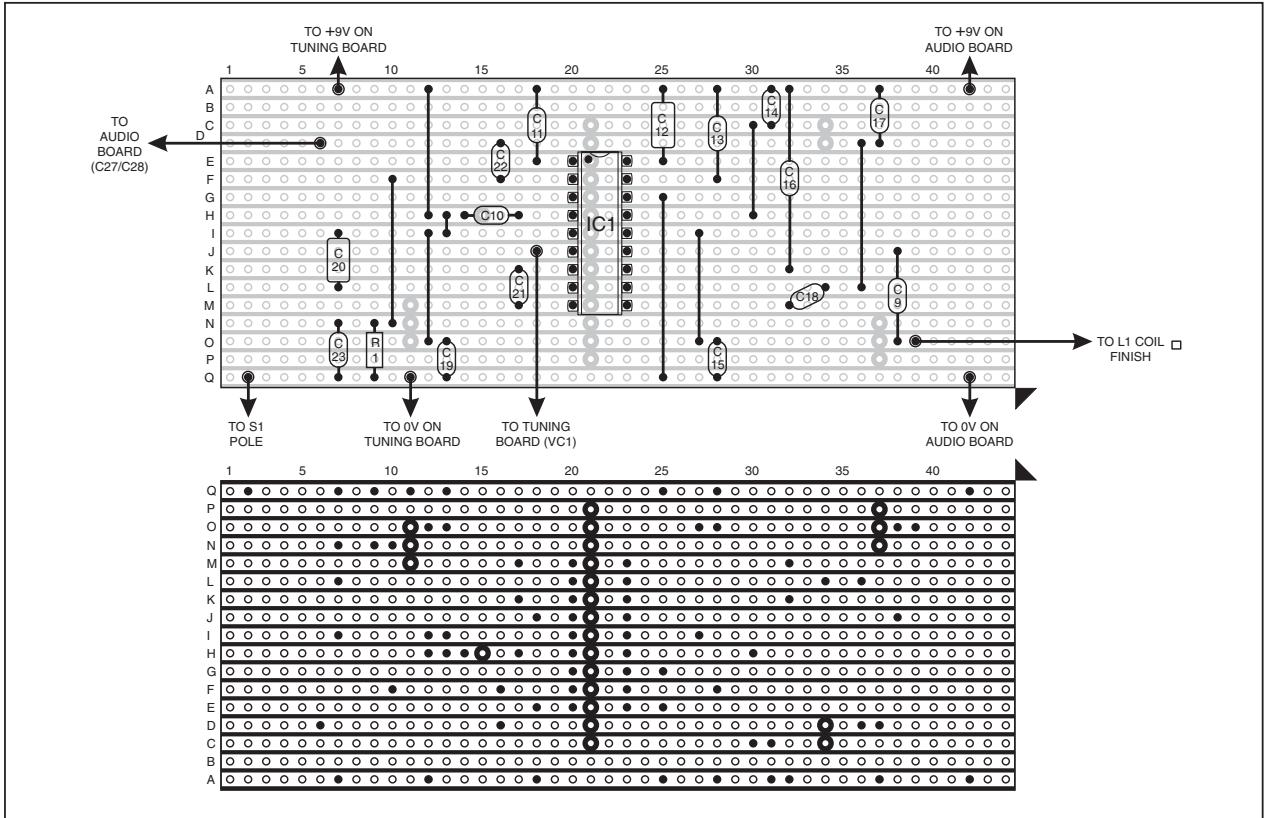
R.F. Tuning board component layout, underside copper strip breaks and lead-off wiring details.
